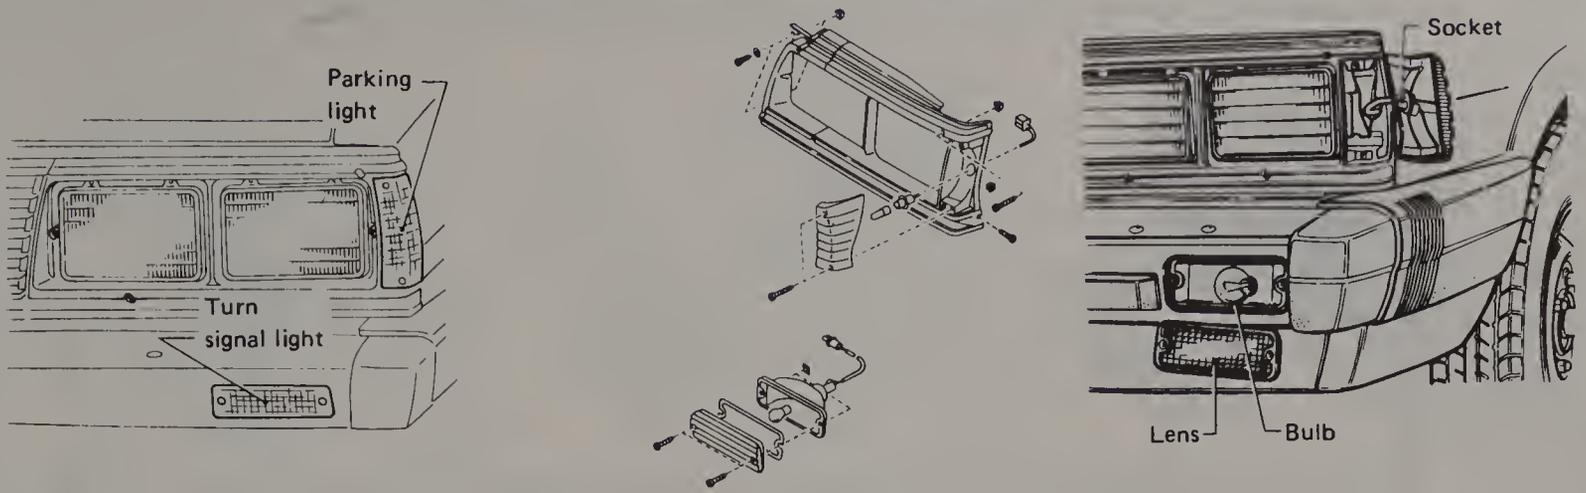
Parking and turn signal light components (dual headlights) – exploded view (Sec 11)
